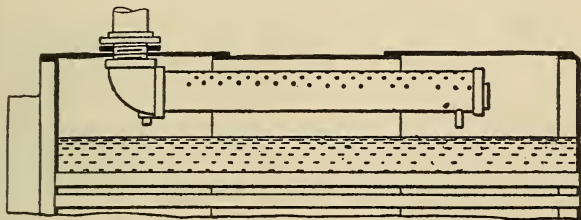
"Dry pipe" for horizontal boiler; it is connected to the main outlet and its upper surface is perforated with small holes, the far end being closed. With this arrangement steam is taken from the boiler over a large area, so that it will contain very little moisture. *All horizontal boilers without a dome should be fitted with a dry pipe*; most engineers do not realize the importance of obtaining dry steam for engine operation.
